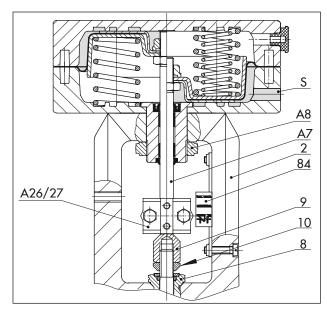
Type 3271 Pneumatic Actuator on a Series 240 Valve
